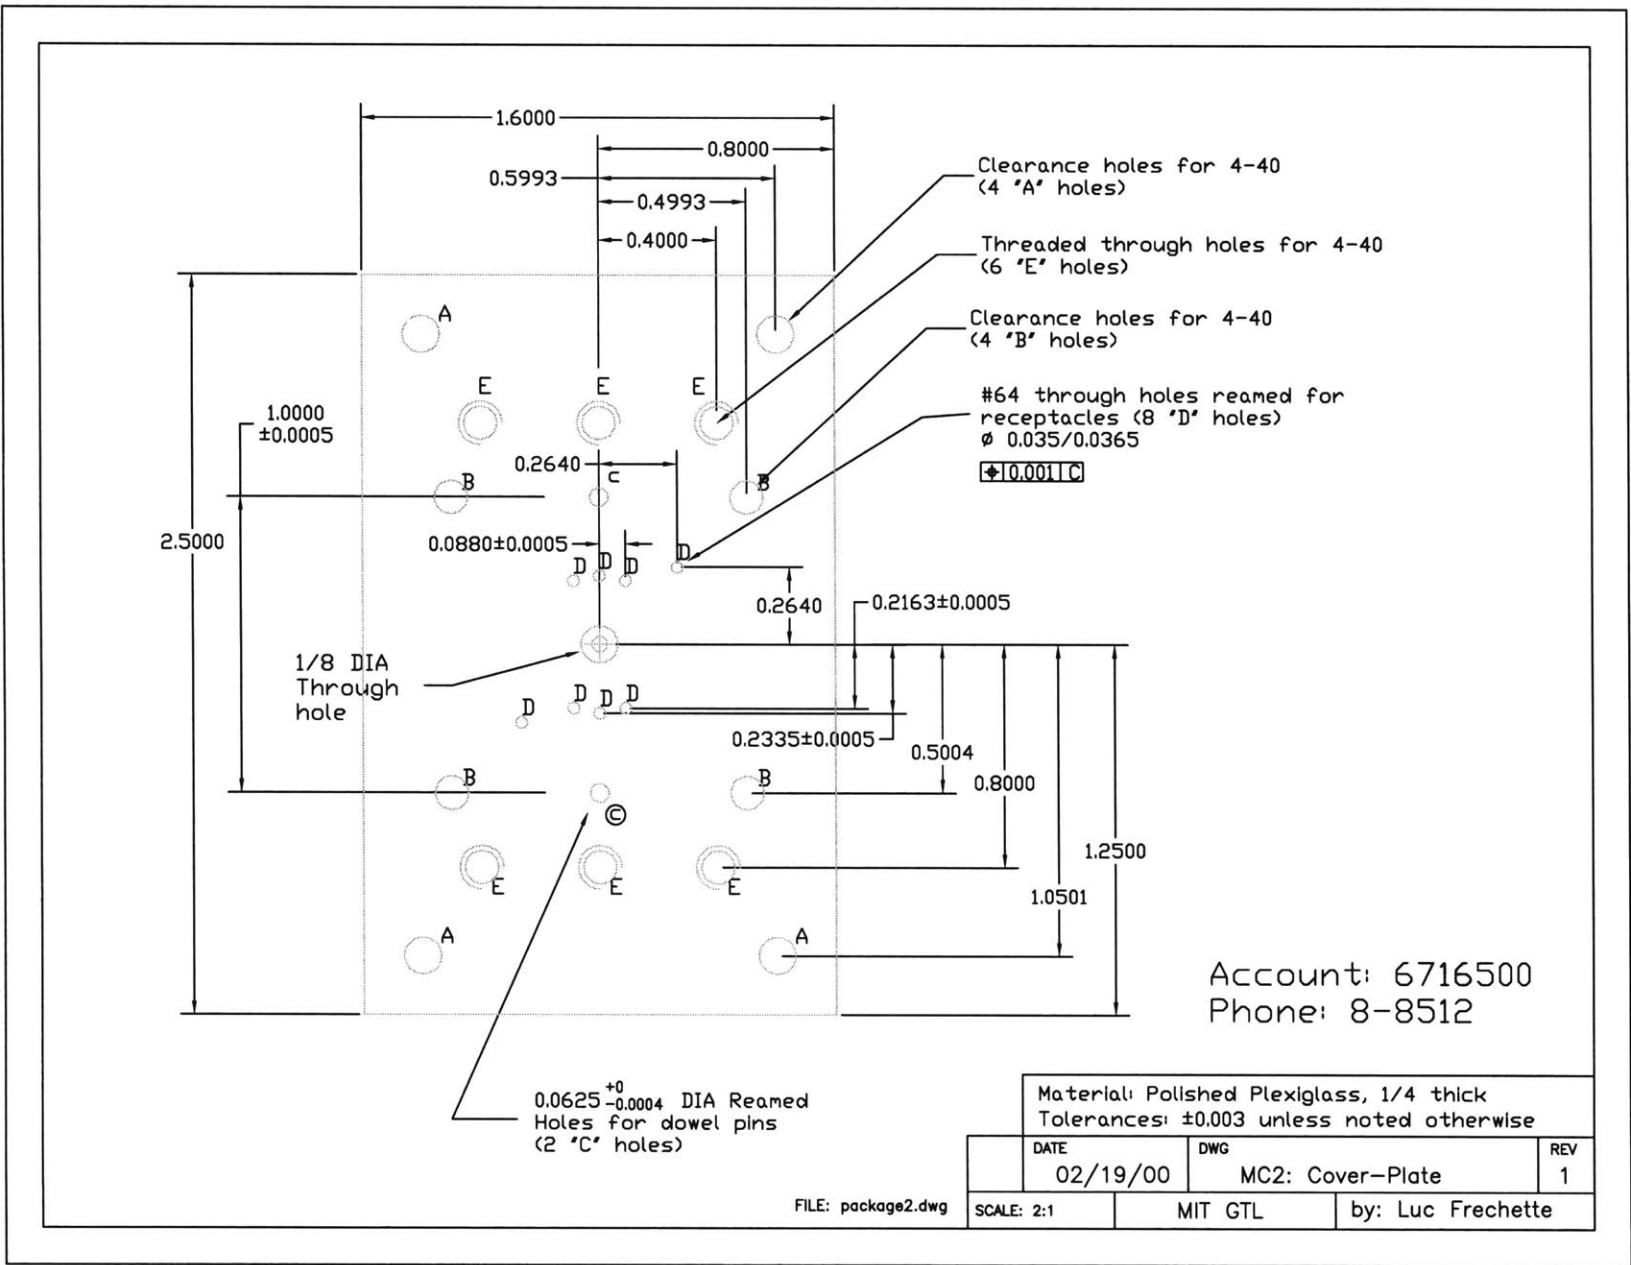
Technical drawings of the MC-Bearing rig and Motor-Compressor package - Electrical cover plate
